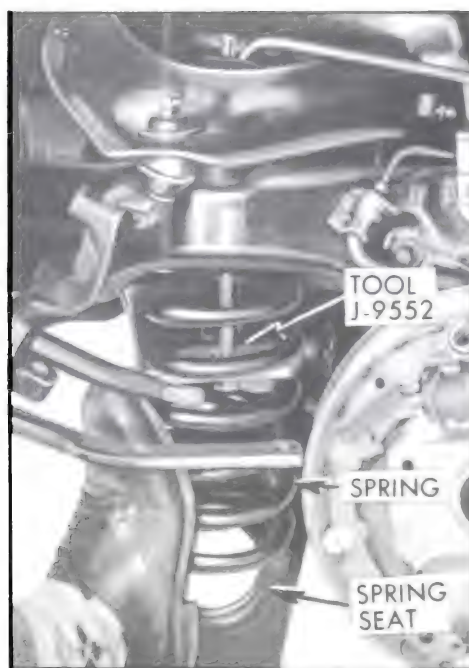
Pushing Spring on Lower Control Arm Seat
